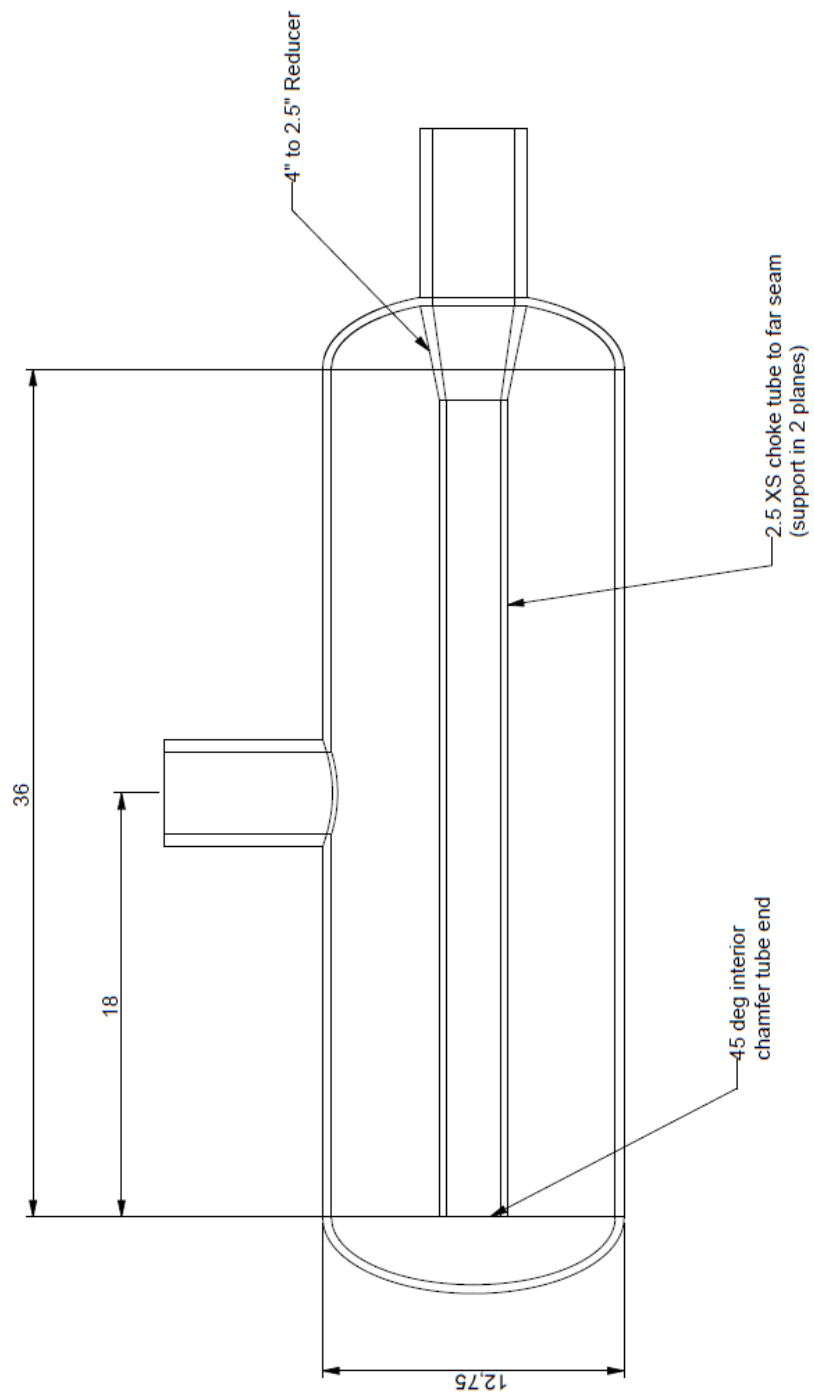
Stage 2 Discharge Bottle (see D825-002)
